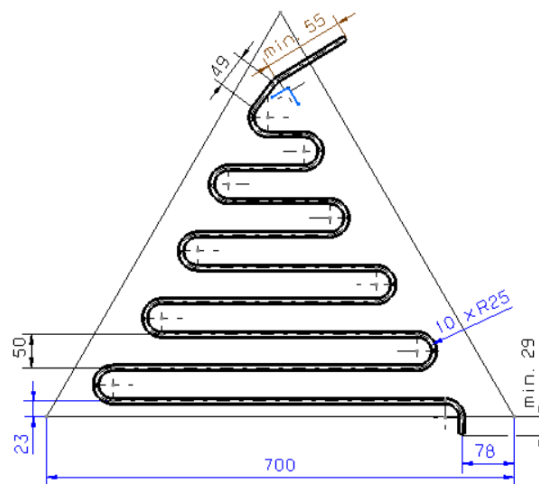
Technical drawing of the absorber plate with connected coil, front view
